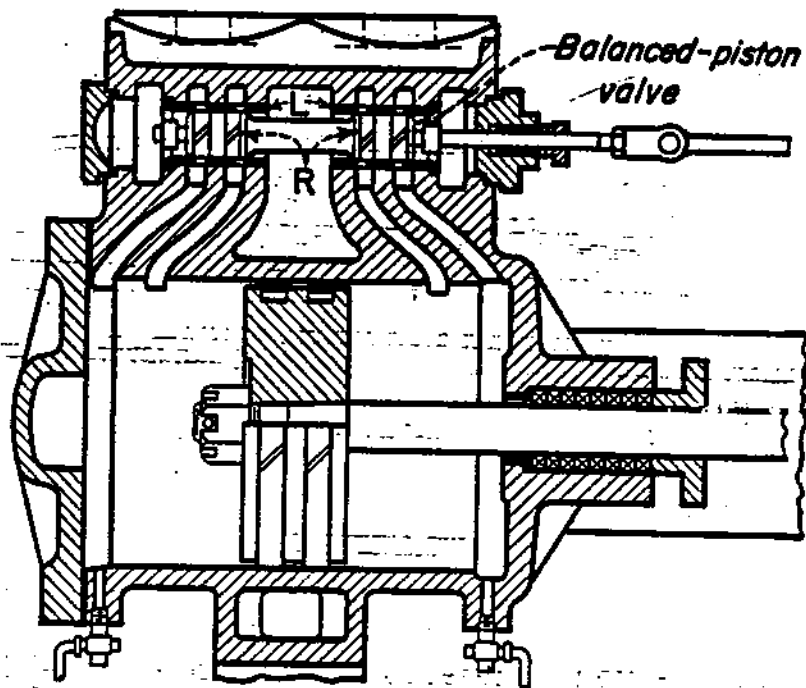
Duplex steam cylinder with integral-piston-valve steam chest.
